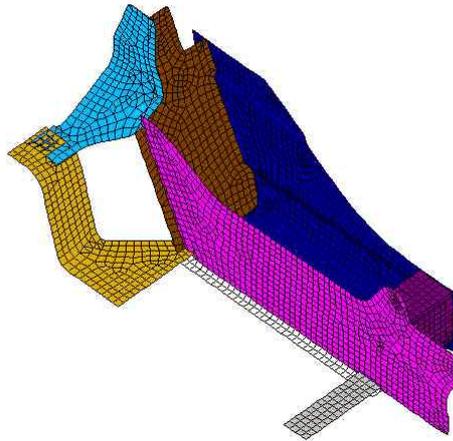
Lift truck frame (only a half is represented here): welded steel plates.
